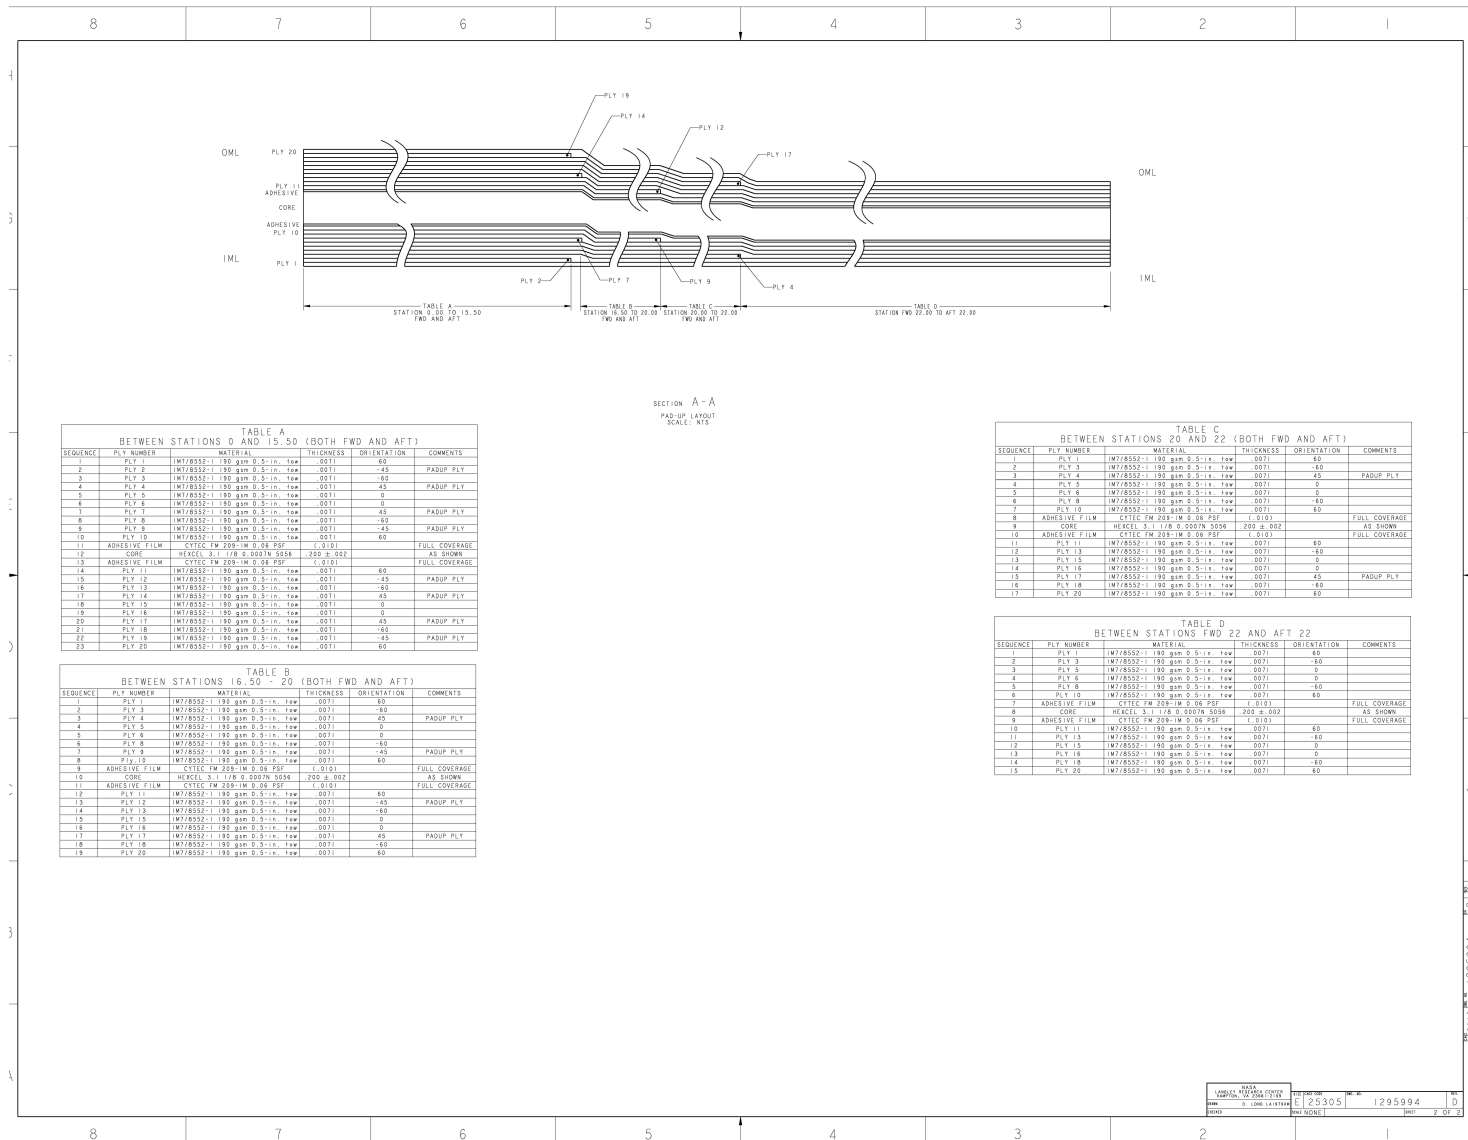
CTA8.2 fabrication drawing showing the design, LaRC drawing 1295994 Rev. D (concluded).
